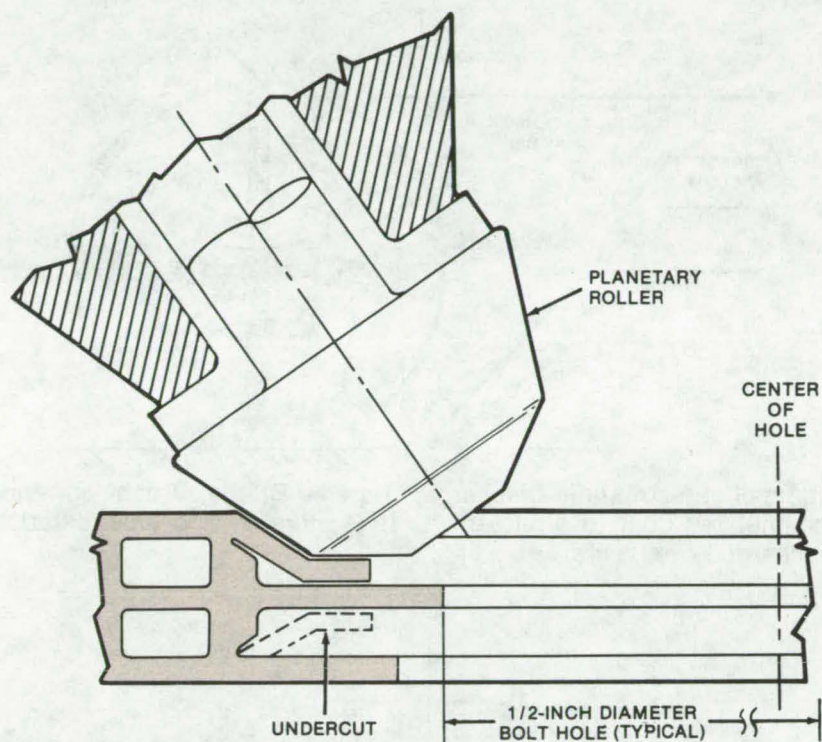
Inner Flanges for Overlap Spot Welding are formed as the planetary roller closes the face sheets onto the core sheet. Previously, the roller had been used to form edge-contact closures over shallower undercuts for brazing or electron-beam welding.
